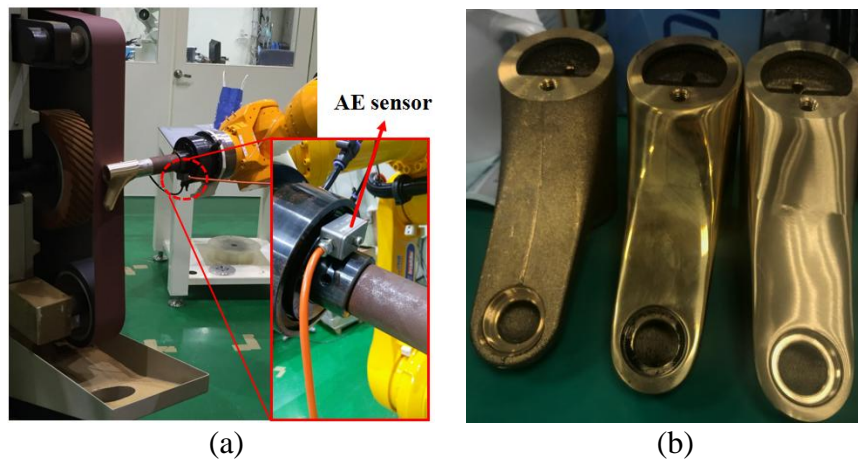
(a) Integrated robot with AE sensor and (b) Workpiece quality through grinding/polishing process
